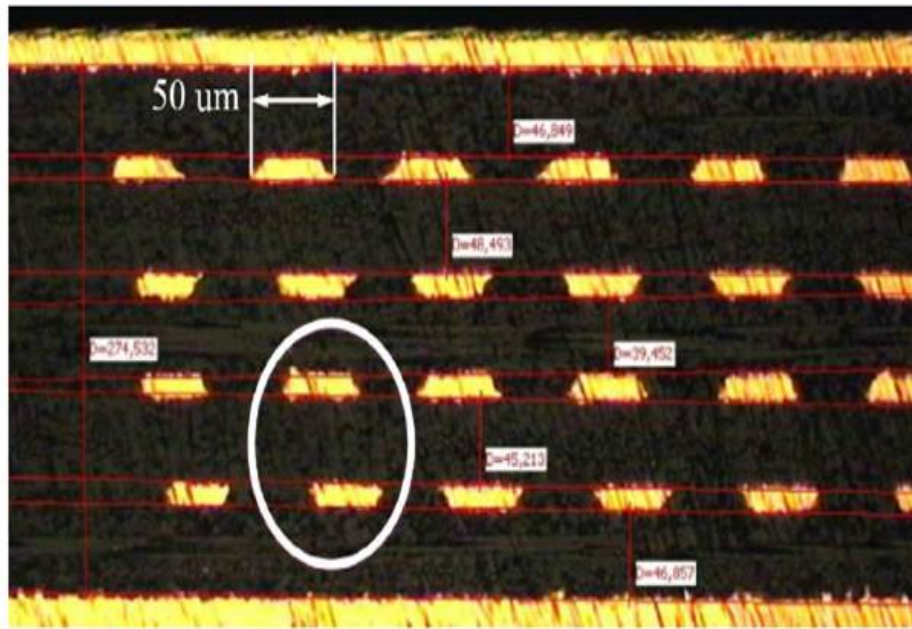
Cross-sectional view of Fermilab PCB coil for CLIC under microscope [5]
